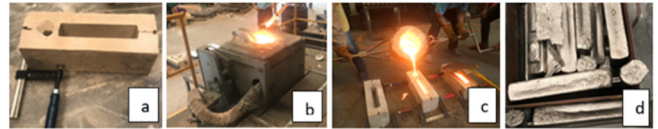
Casting process (a) prepare the sand mold, (b) Melting and casting, (c) poured into the mold, (d) casting piece.
